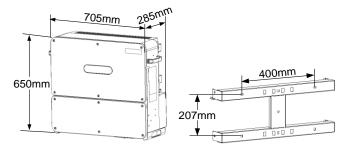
Structural dimensions of hopeSun series (right, front, back, unit: mm)
